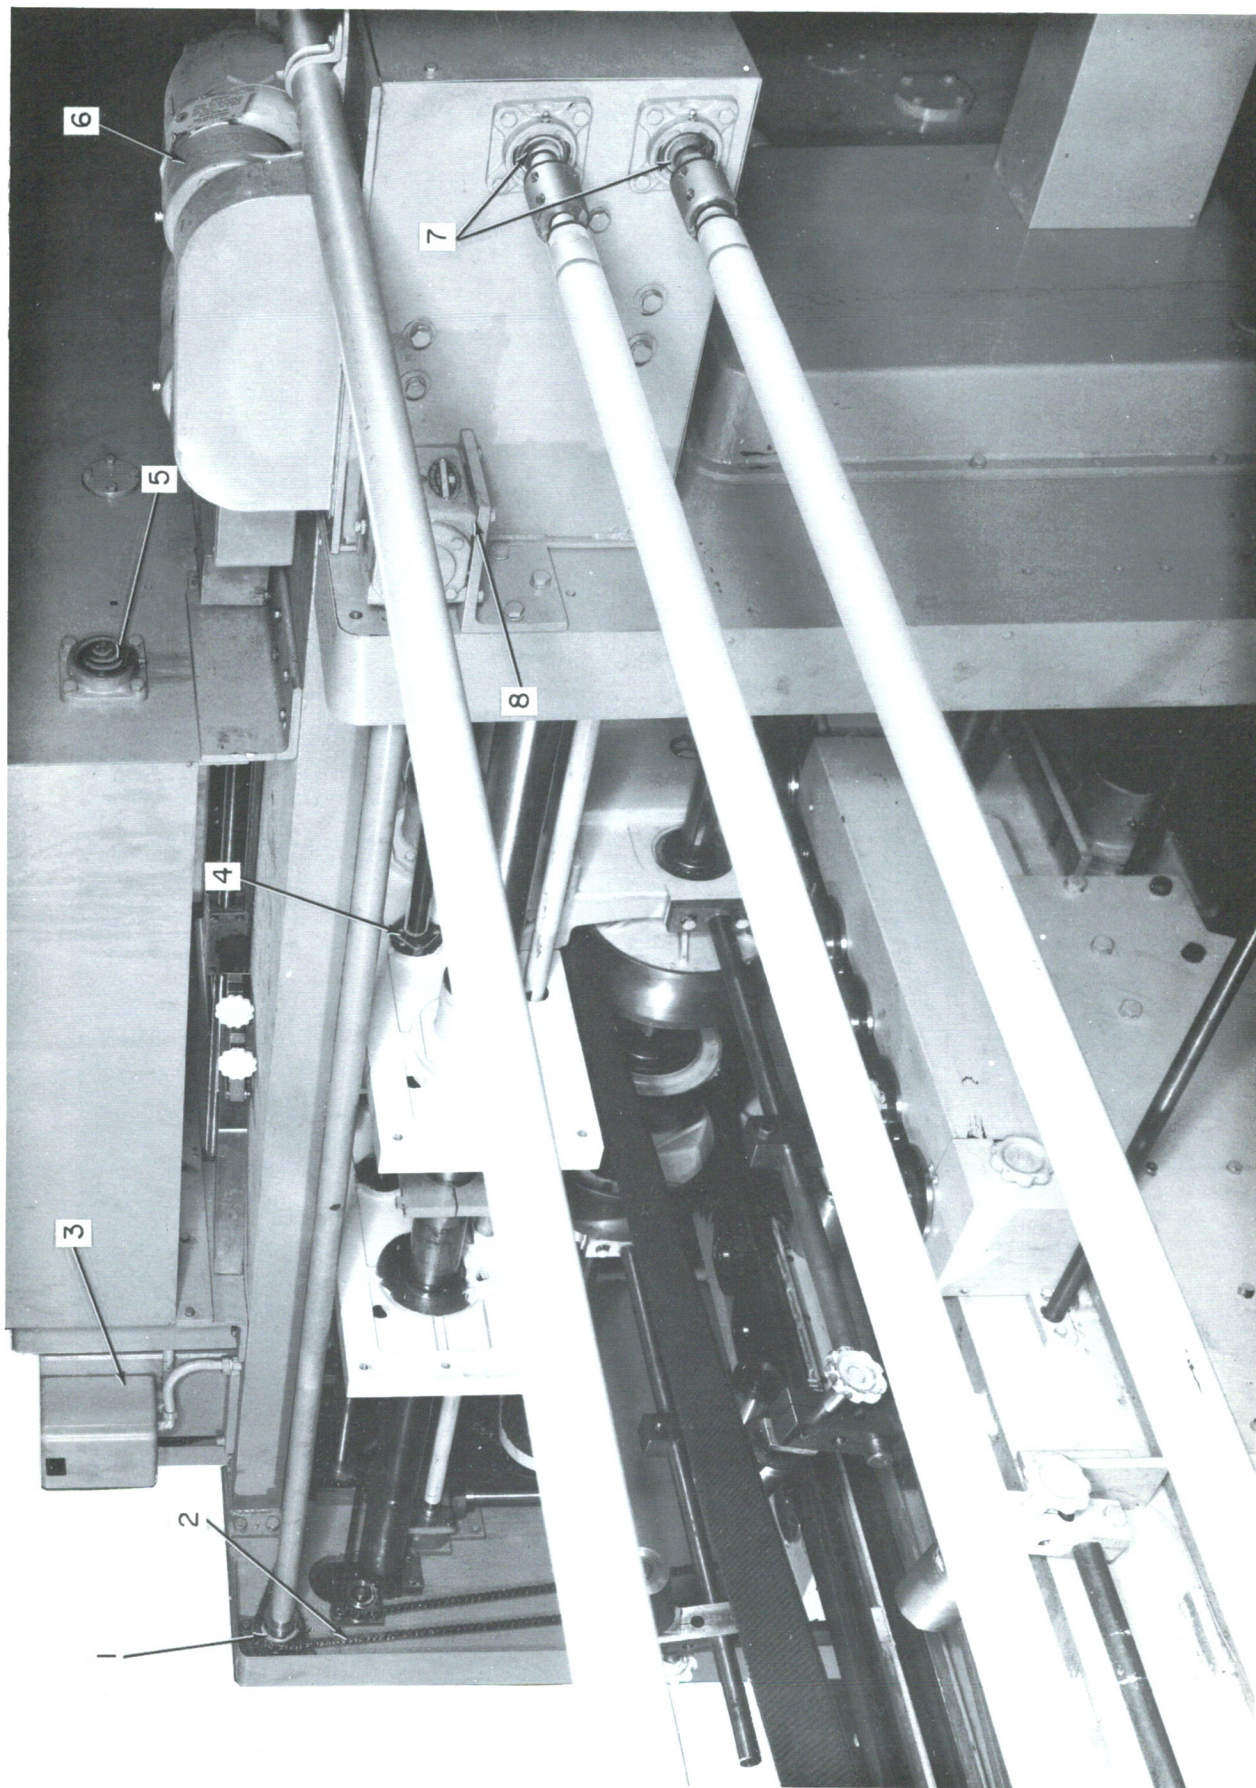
DELIVERY END LUBRICATION, DRIVE SIDE (VIEW 1)
